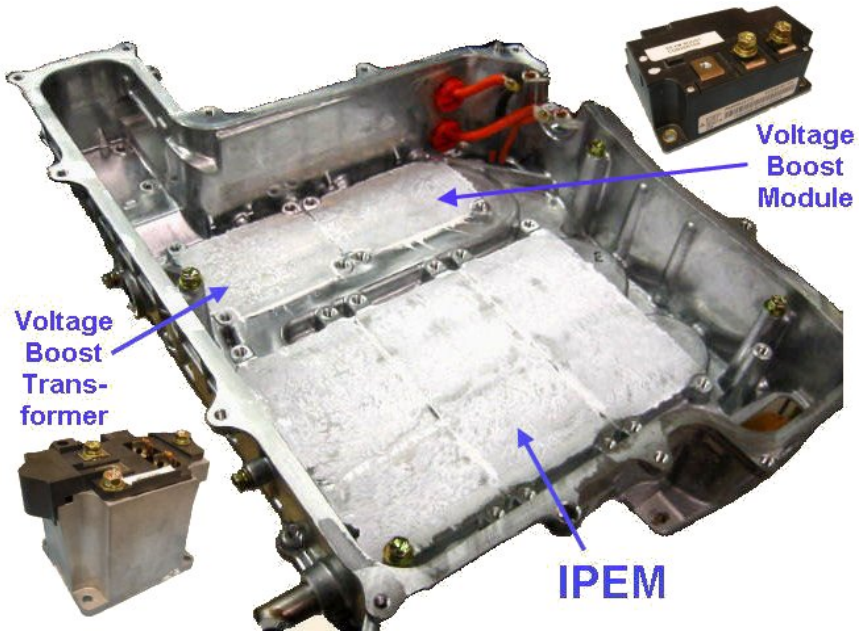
Empty inverter/converter housing showing cold plate surfaces.
